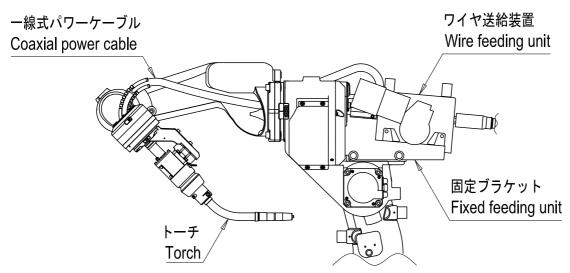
Adjustment of the coaxial power cable (For B6 type manipulator)
